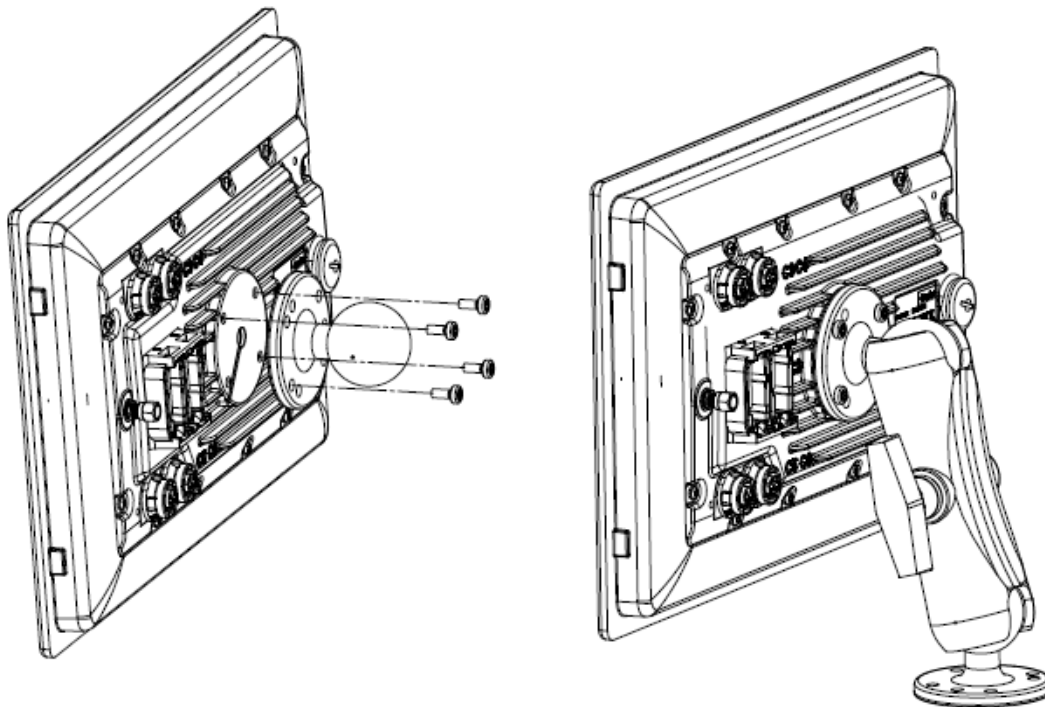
Pro Display 12 swivel mount method using RAM ball. First RAM ball is installed into rear side of the Pro Display and the second RAM ball into assembly surface of the vehicle.
